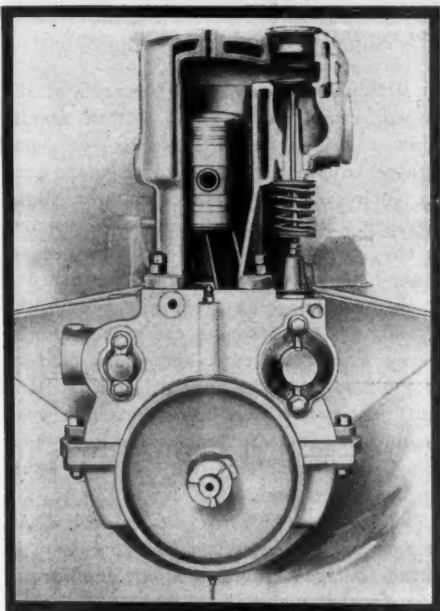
Sectional View of Front of Motor Showing Piston, Valve, Water Jacket and Combustion Chamber. The Arms at the Extreme Right and Left are the Two Supporting Members at Forward End of Power Plant. The Third Point of Support Is Central to the Forward Arms and at the Extreme Rear of Unit Power Plant
